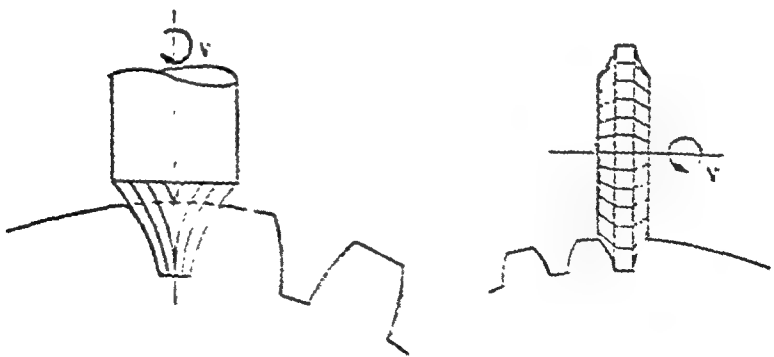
Cutting Action of End & Disc Types of cutters
